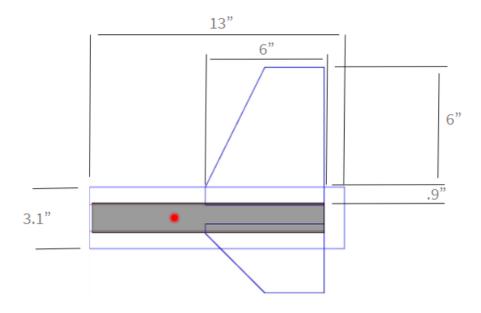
Dimensions of the fins, showing trapezoidal and tabular design
